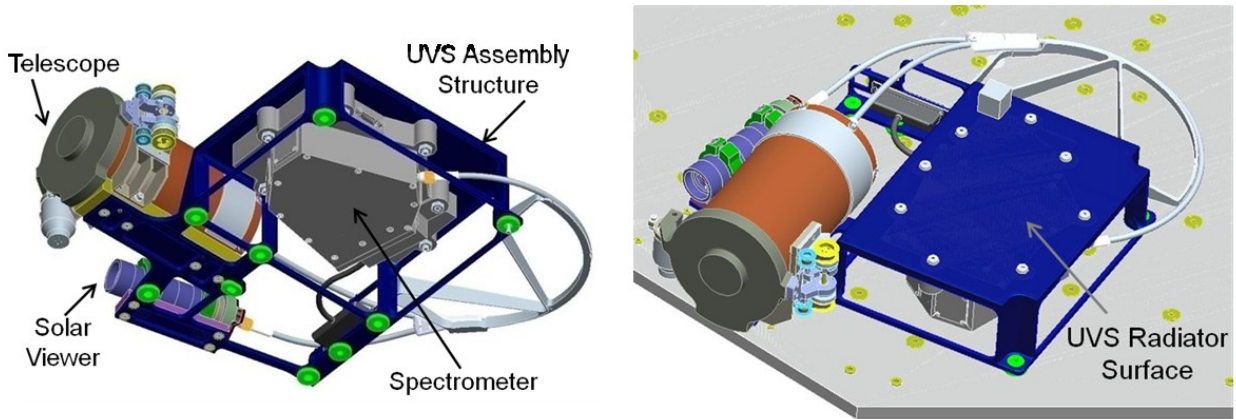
The UVS spectrometer is inverted and mounted to the bottom of the assembly structure, flowing heat from the spectrometer out through the radiator surface of the assembly plate.
